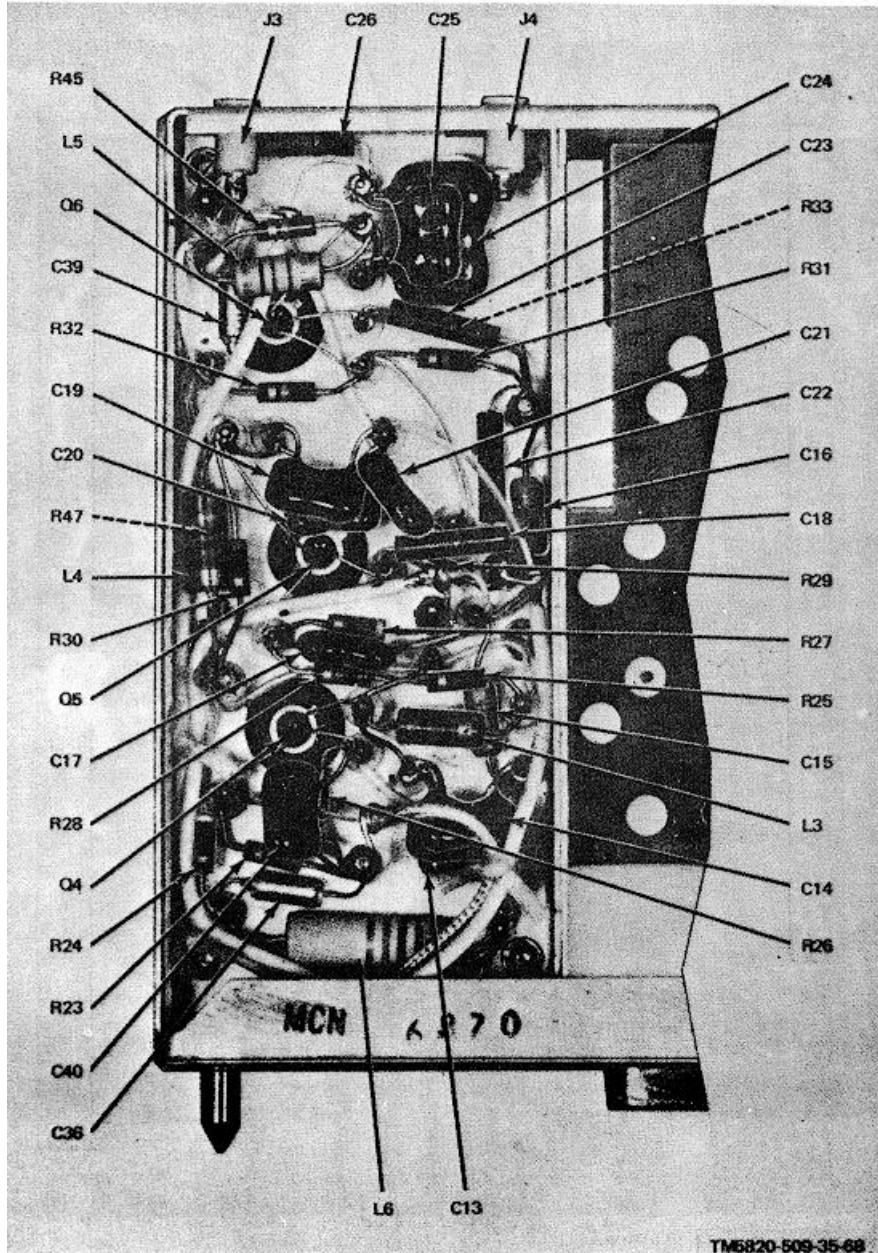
Radio Frequency Oscillator O-1032/PRC-47 (A8A6), Side View, Cover Removed, Chassis Assembly.
